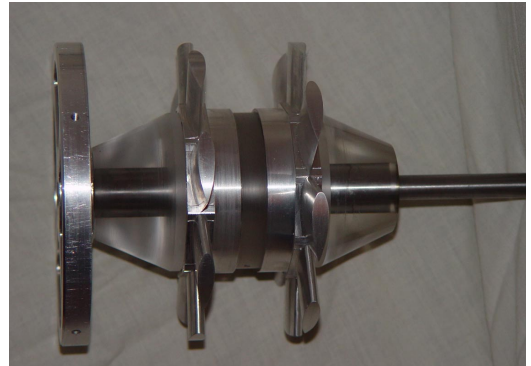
Second fabricated turbine rotor (simulated) - including one bearing mounting on left hand side
